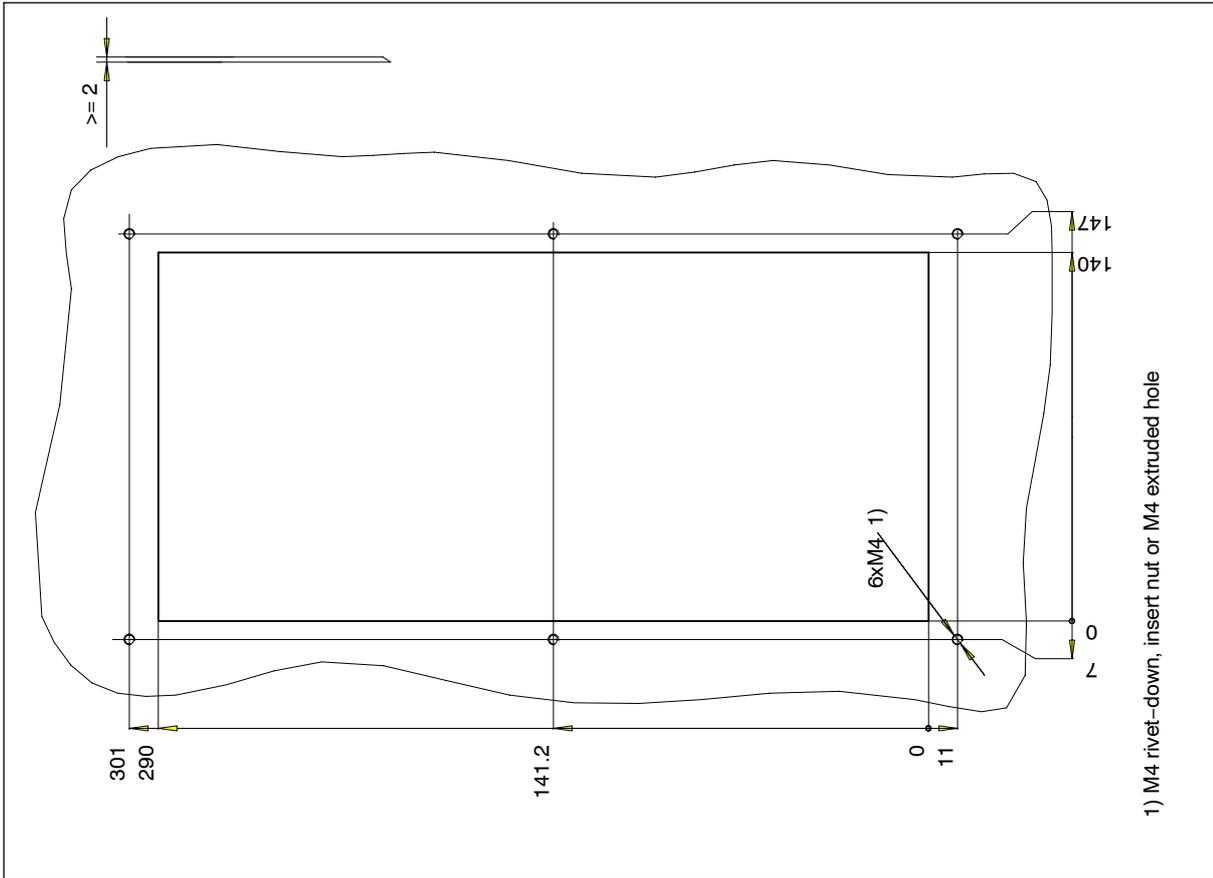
Drilling pattern for the machine control panel (MCP)
